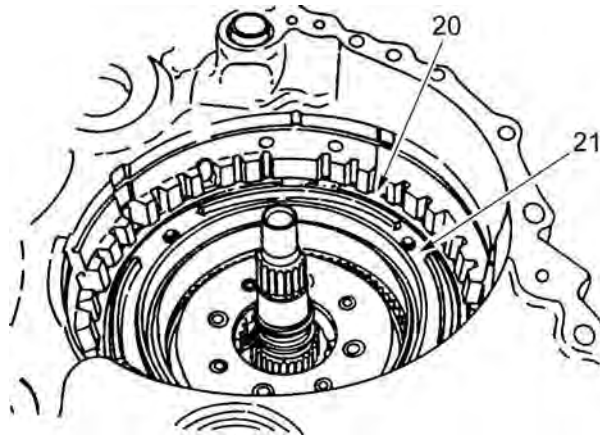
Third Clutch Piston Housing Assembly and Retaining Ring Installation.
